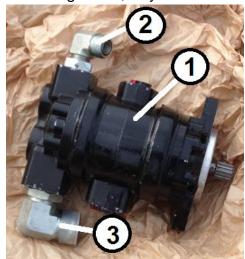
Hydraulic Pump Assembly Key 1 – Pump Key 2 – 90 deg, -12 Key 3 – 90 deg -20 to -16
